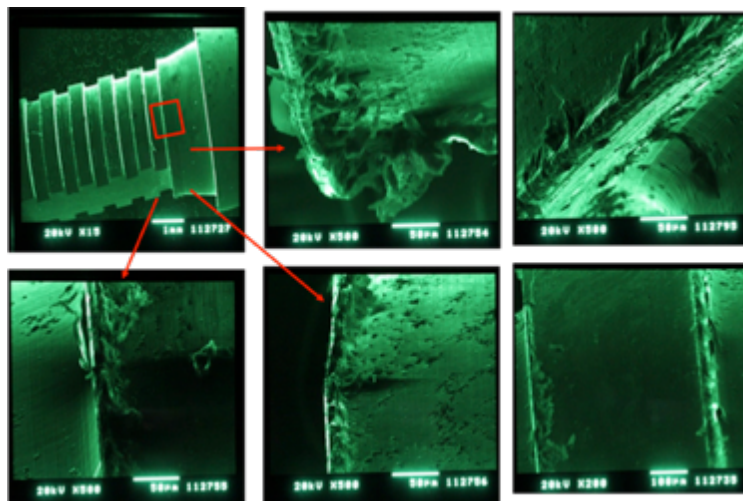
Surface defects and scratches on prototype abutments, as seen using SEM
